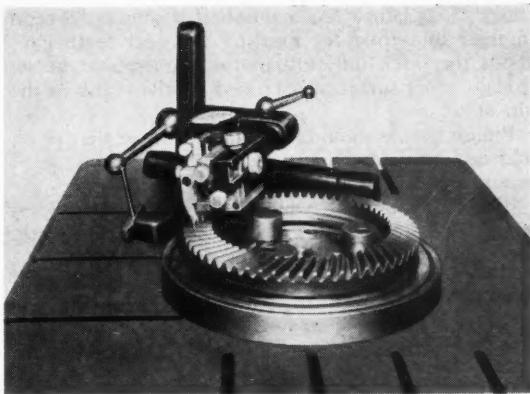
Equipment for checking tooth spacing and gear concentricity.
